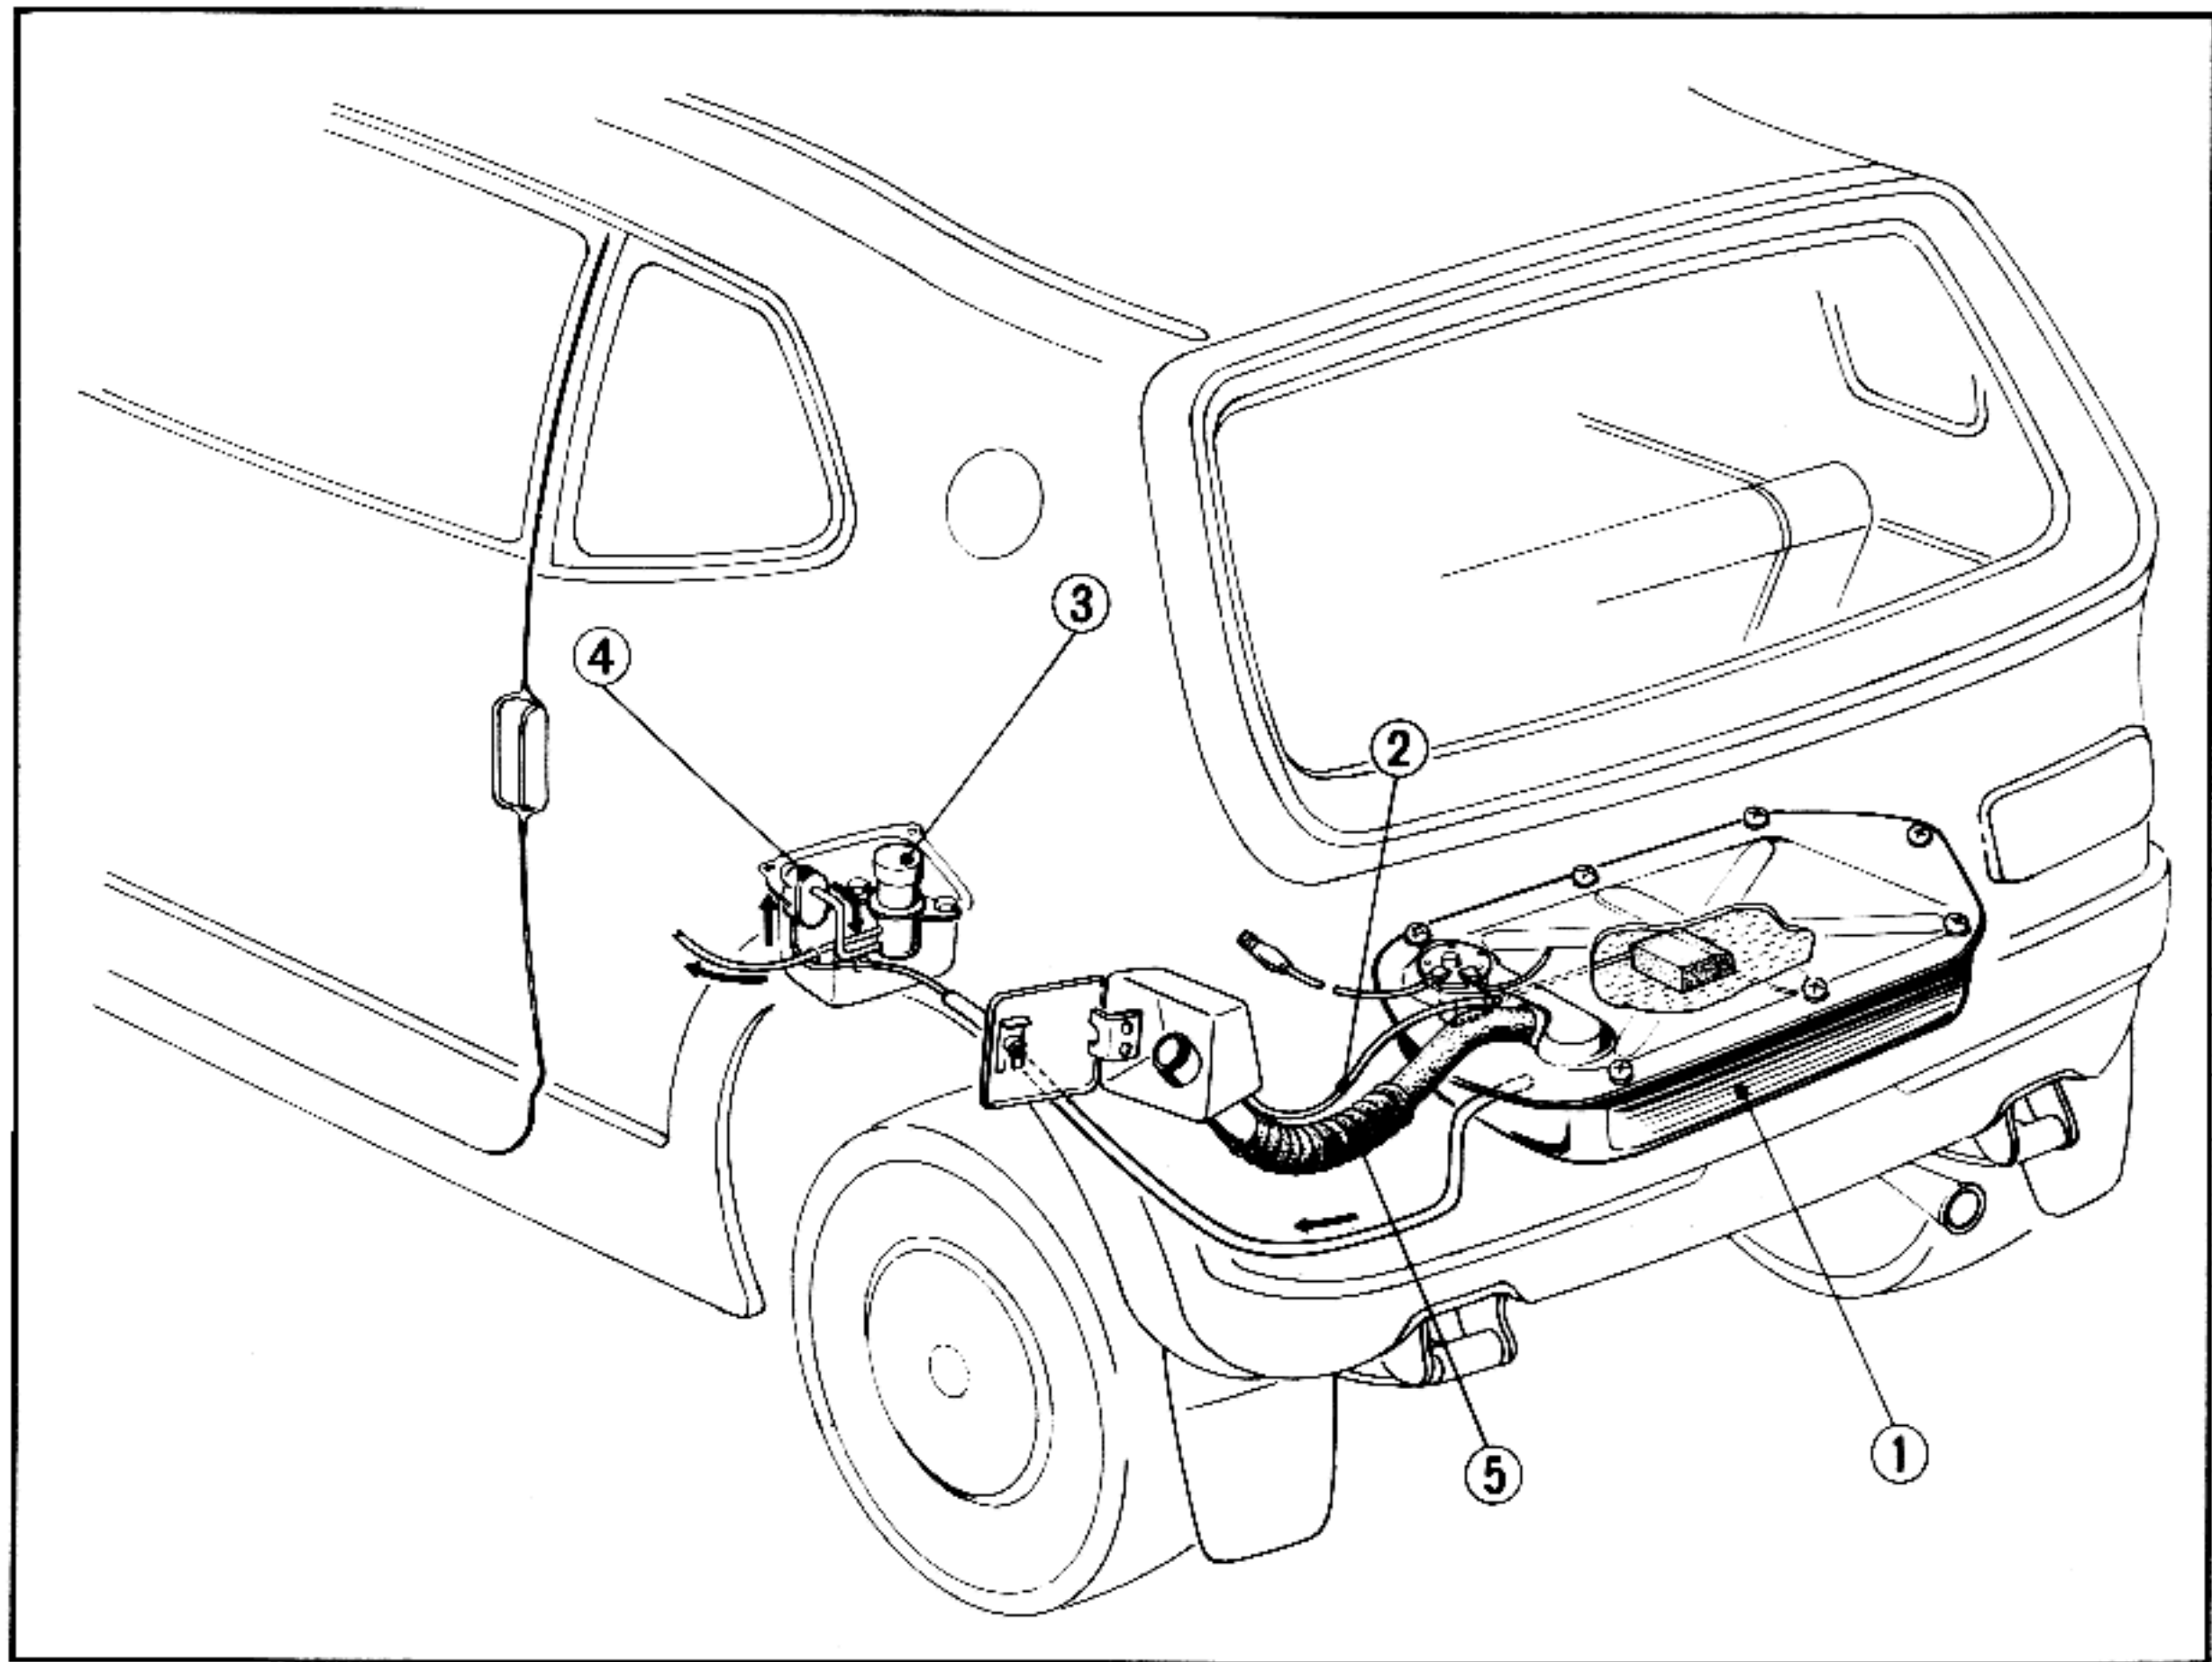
① Fuel Tank ③ Fuel Pump ⑤ Filler Neck Connecting Tube
